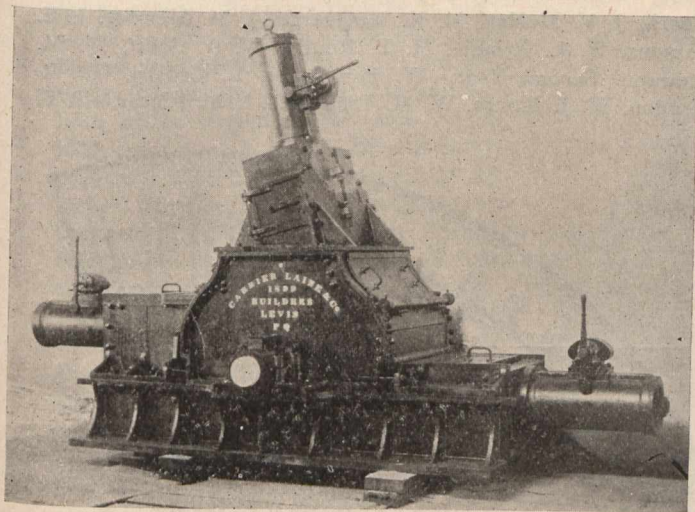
Pulp grinder, manufactured by Carrier, Laine & Co.
